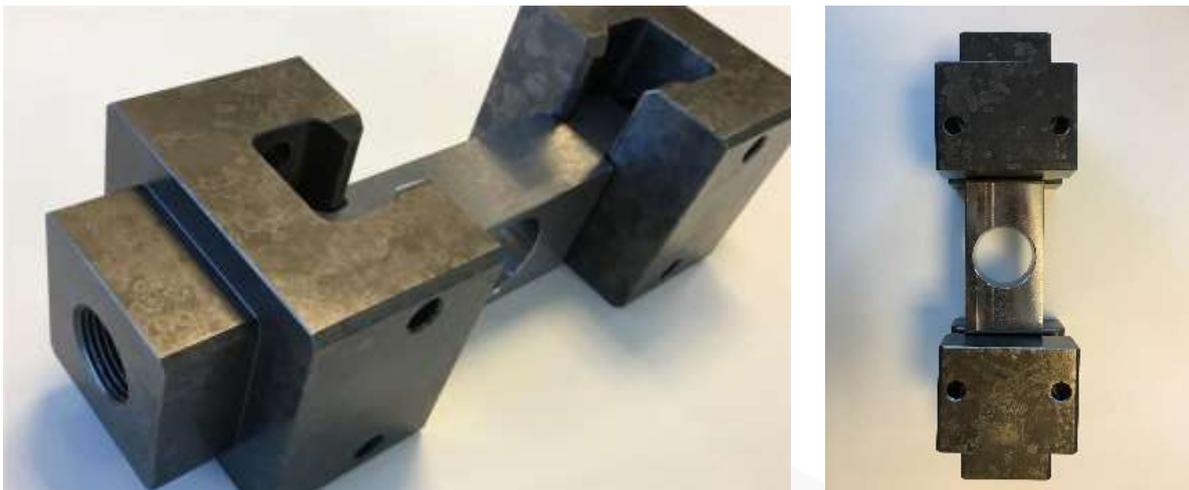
Initial clamping tools and dummy specimen for the testing set up
